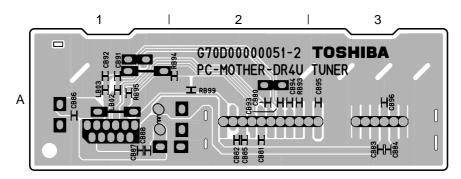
EU05A Tuner Unit PC Broad (Bottom side)
